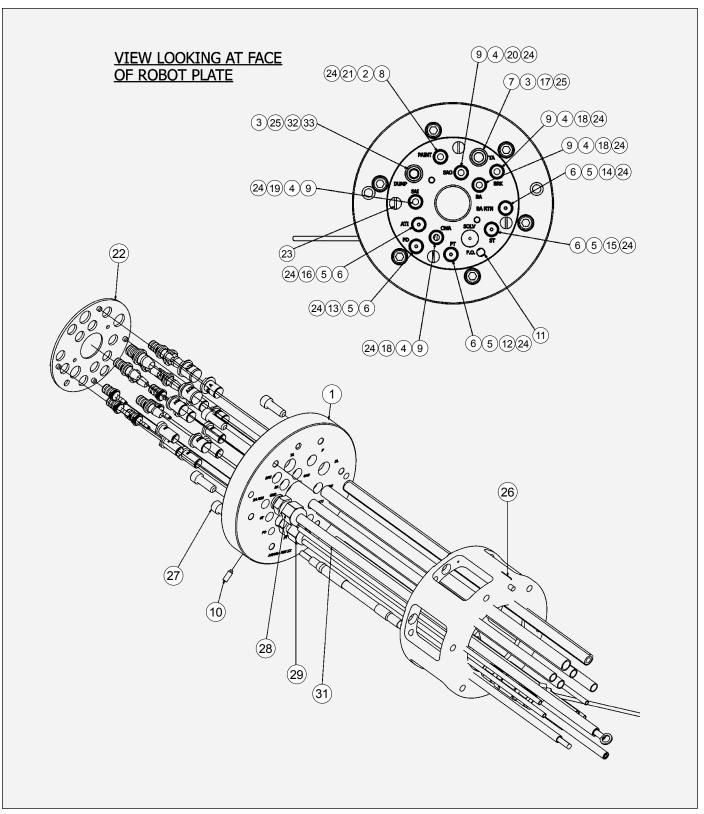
A13454-XXXXX Tubing Bundle Assembly
